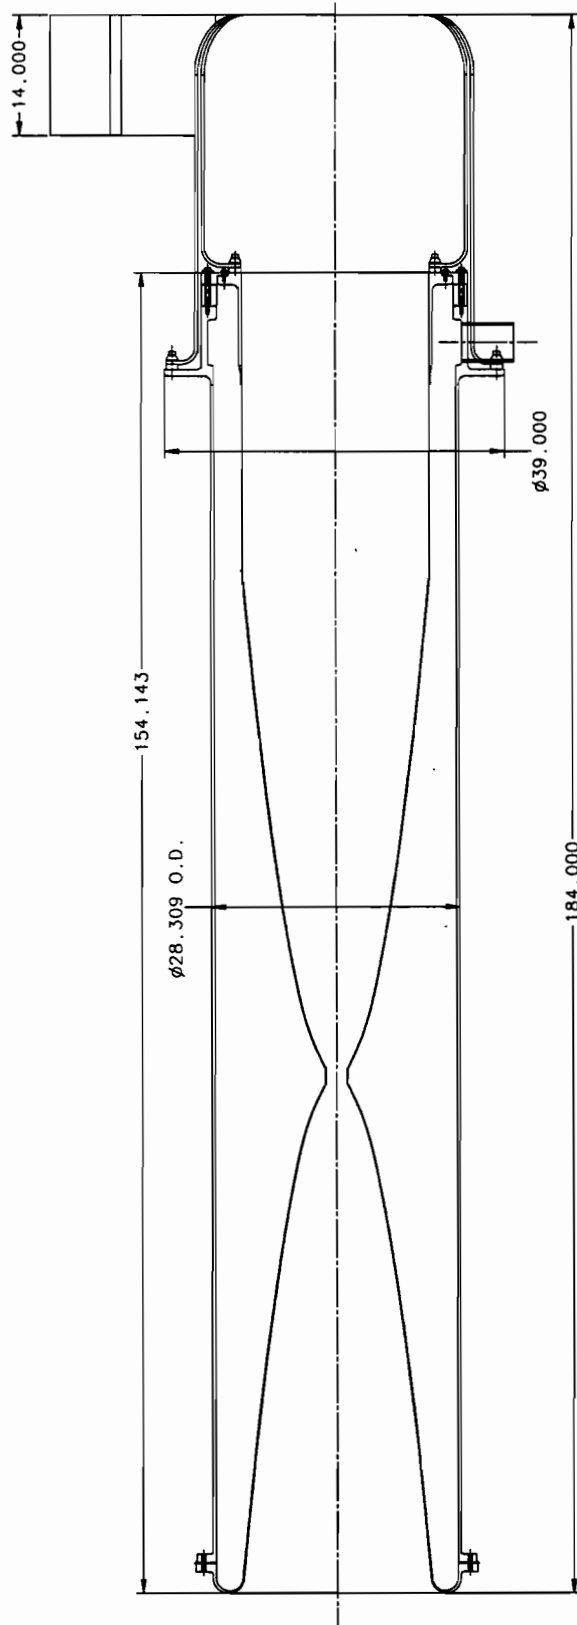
Second focusing horn. Dimensions shown are in inches.
